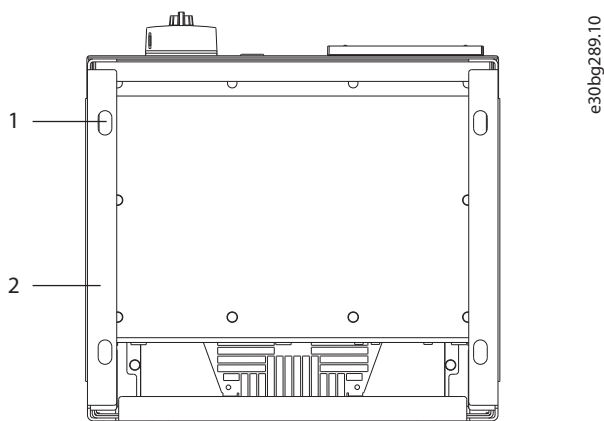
Pedestal Installation in D7h/D8h Drives
